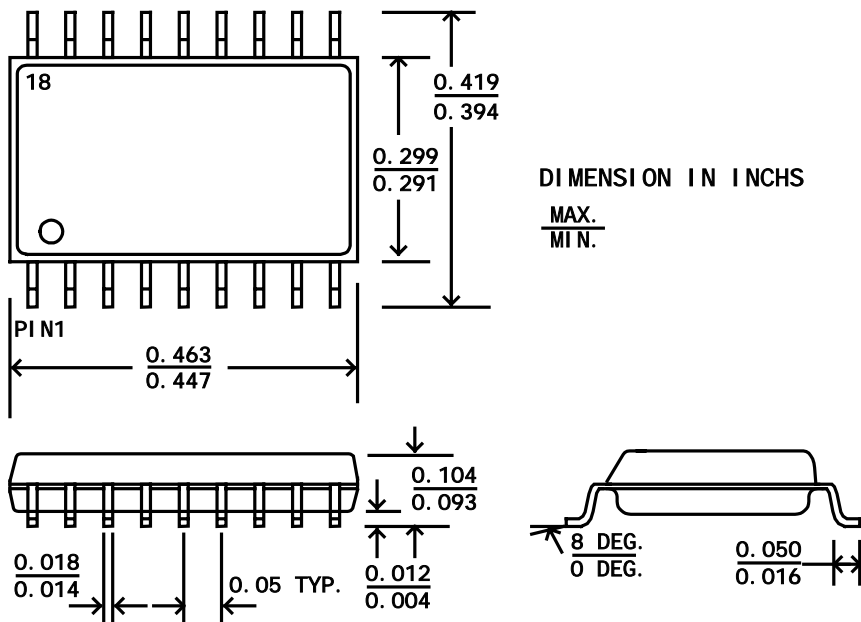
Package Outline Dimension for 18-Pin SOP
